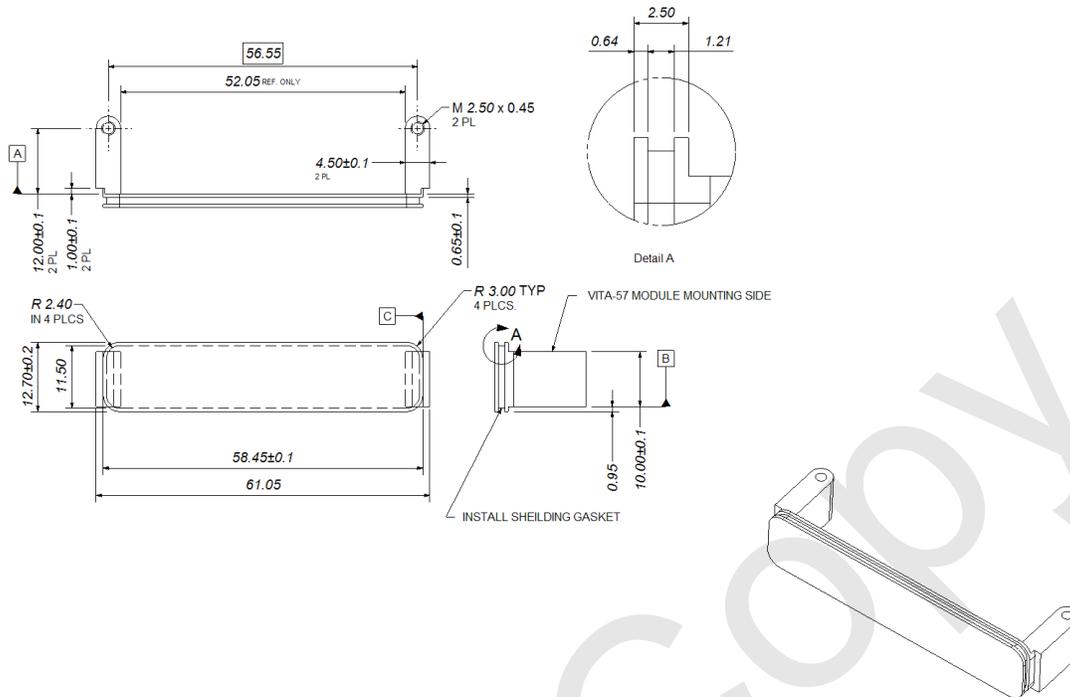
FMC Front Panel Bezel Mechanical Dimensions
